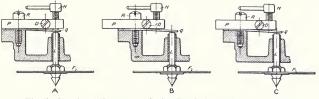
Showing Adjustment of Spring Regulating Cadillac Carbureter. Cadillac Motor Car Company, Detroit, Mich,
